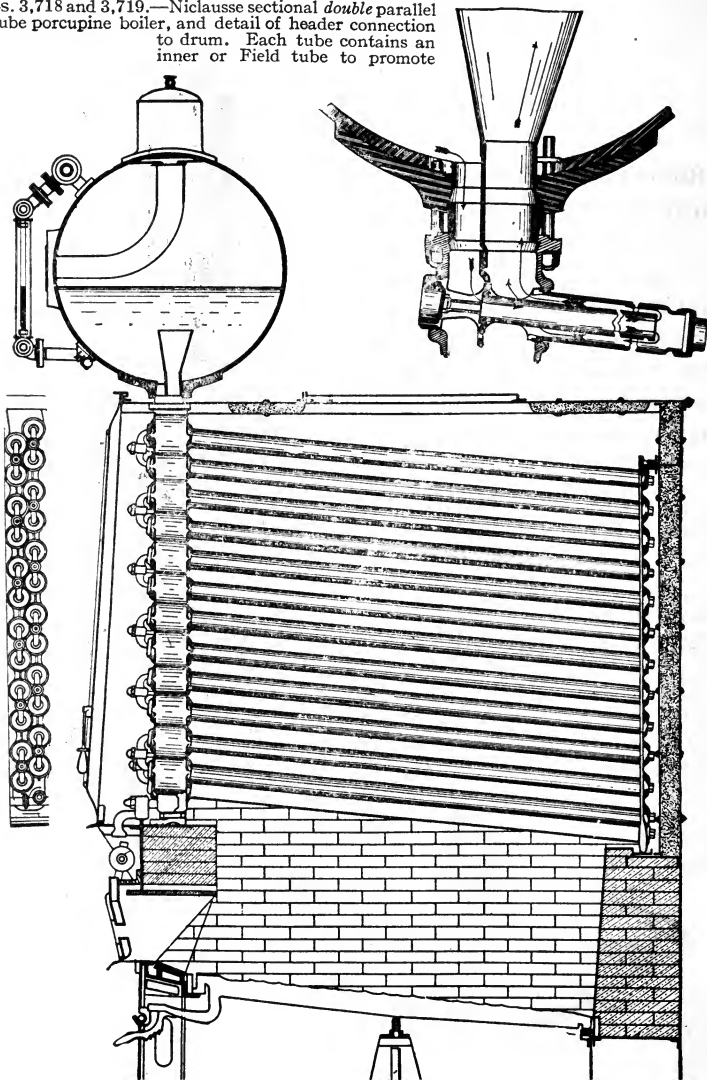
,716 and 3,717 show respectively the parallel and radial types, these being single tube boilers, and figs. 3,718 and 3,719 a double tube boiler of the parallel tube class.
